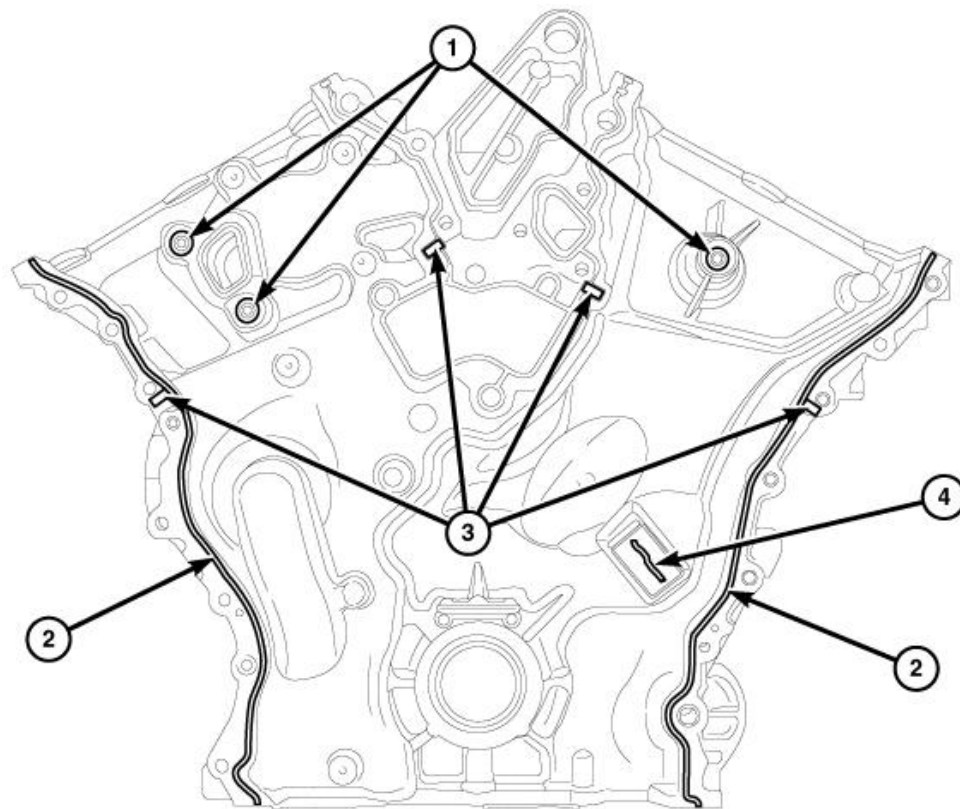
Sealant At Cylinder Head Bosses, Right & Left Flanges, Cylinder Head-To-Engine Block T-Joints & Cover To Right Cam Chain Tensioner Gap
